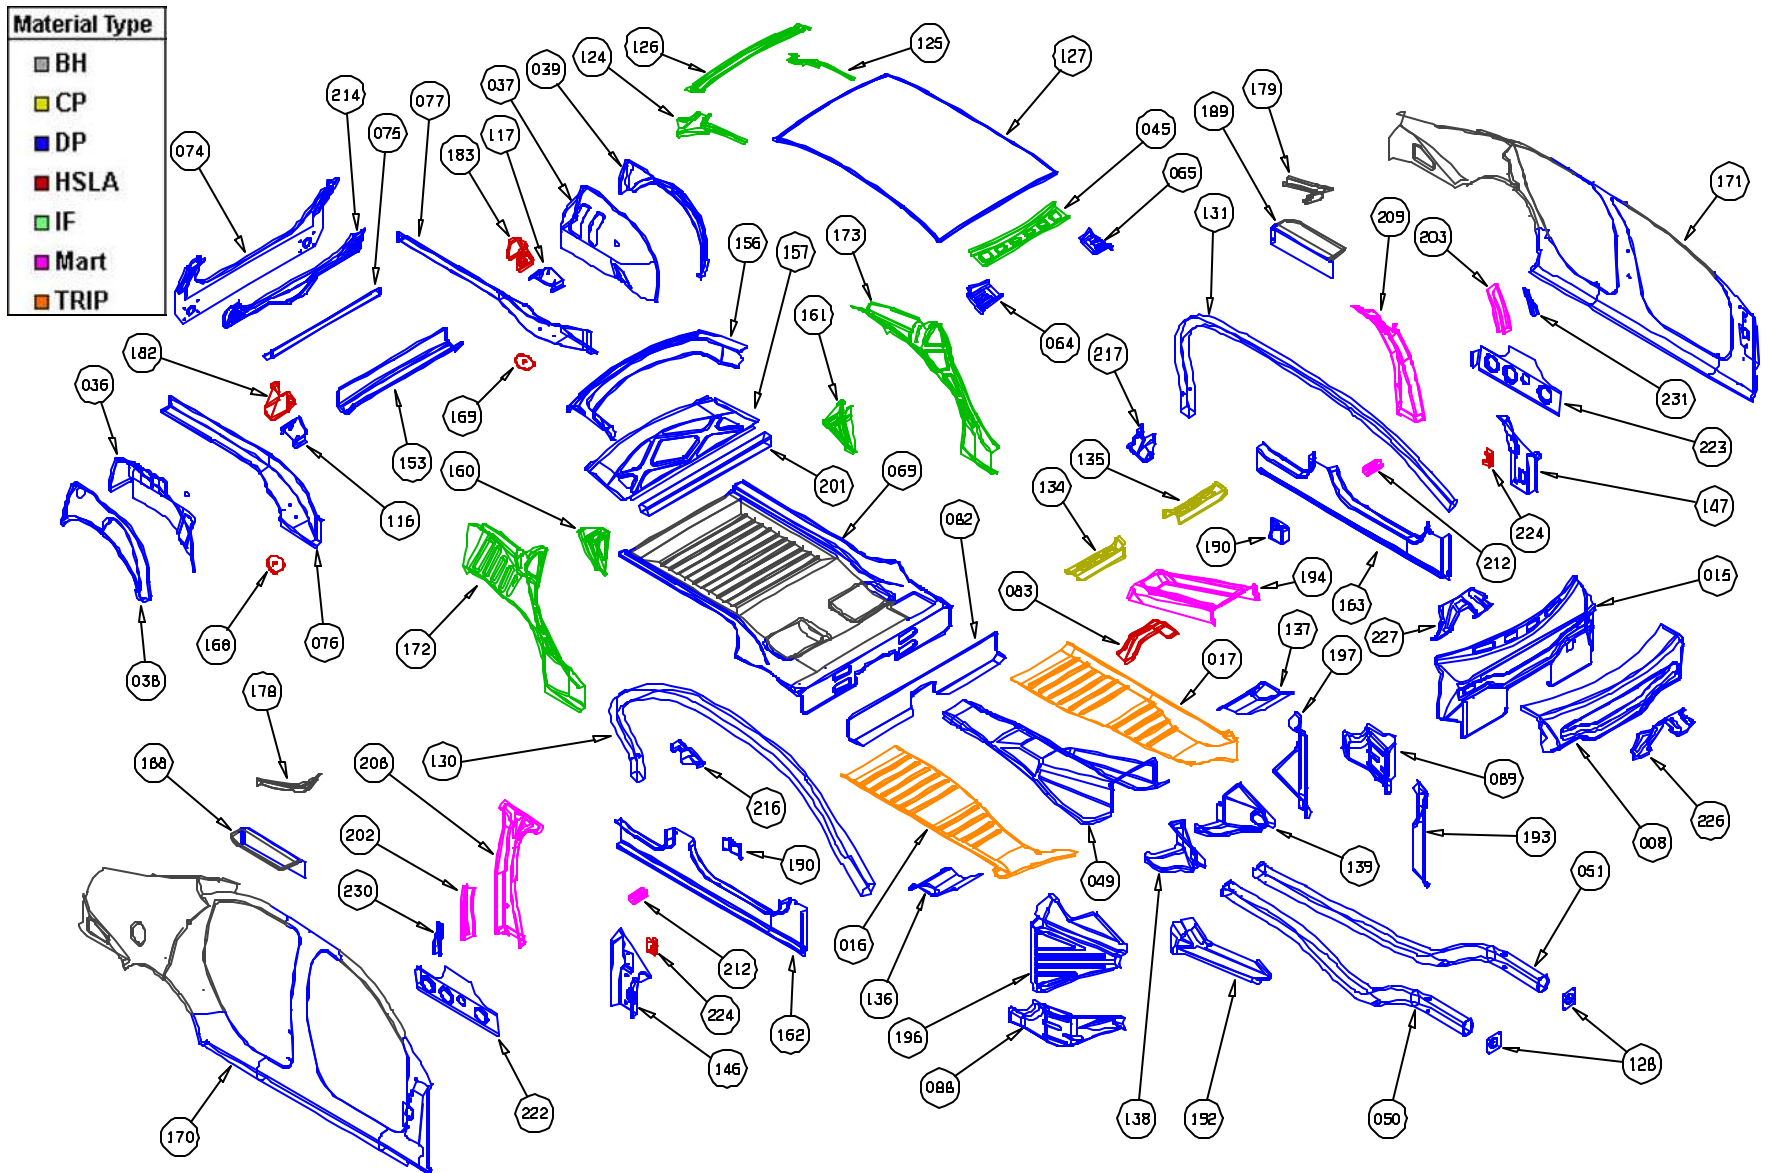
Exploded view of final ULSAB-AVC PNGV-Class concept design, showing steel types selected for individual parts.
